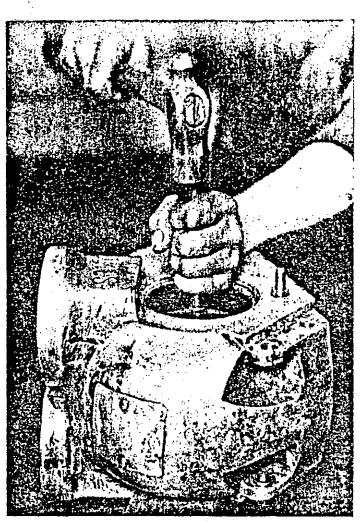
REMOVING RIGHT-HAND CRANK.
